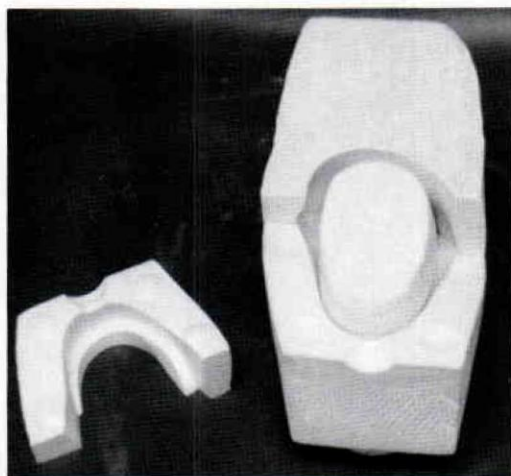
Mold partly assembled over modified foot, showing areas removed to fit socket.
